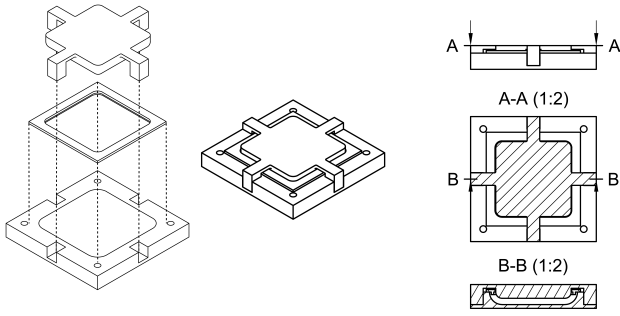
An overview and section view of the mold assembly. On the left the three different mold components and the total assembly. On the right three cross section views of the side-, top- and intersected-view, respectively.
